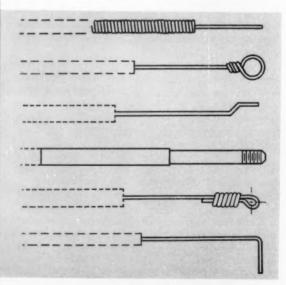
Methods for attaching linkages to the ends of solid-wire cables.
